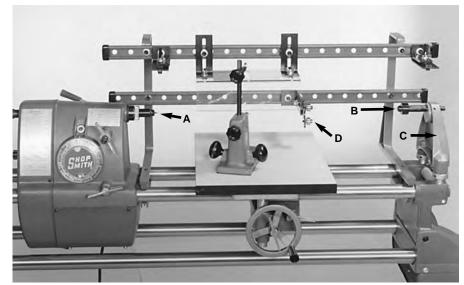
The Lathe Duplicator mounts on the Mark V. The Mark V accessories that are used for spindle duplicating are: (A) drive center, (B) cup center, (C) tailstock and (D) optional steady rest. For faceplate duplicating a faceplate is mounted on the main spindle.
